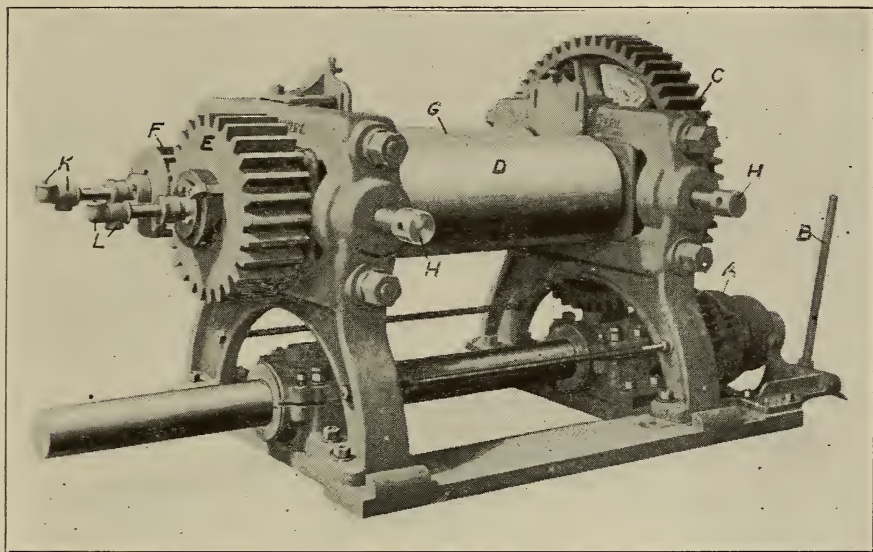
STANDARD SINGLE GEARED MIXER.
